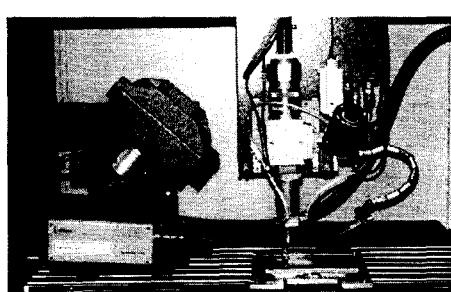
Experimental setup for investigating vapor plume during laser welding.
